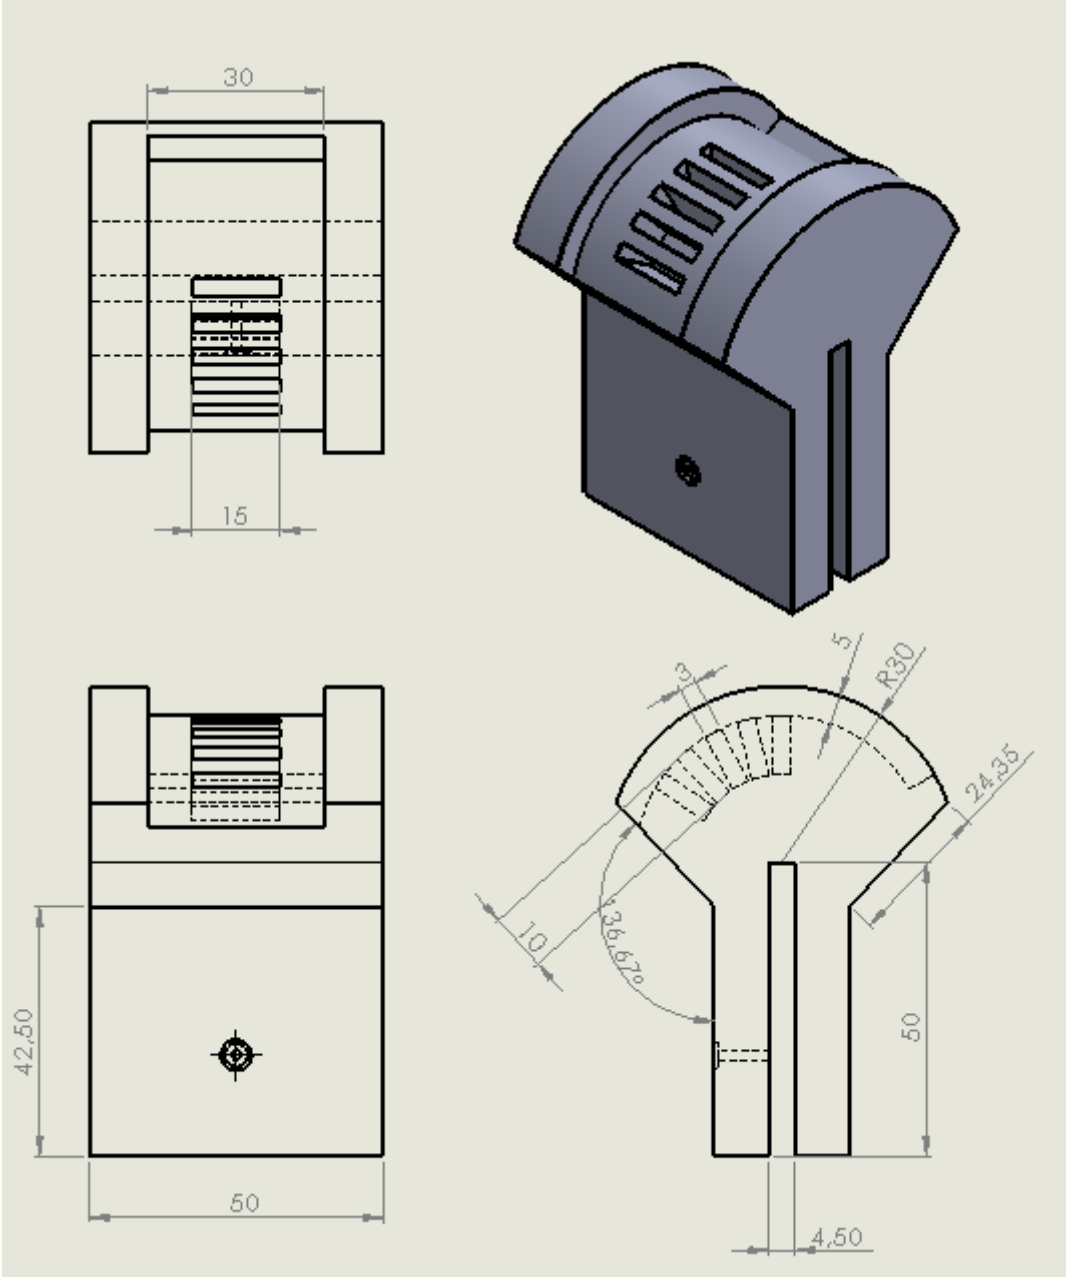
Drawing of the “DC motor mounting foundation” with dimensions.
